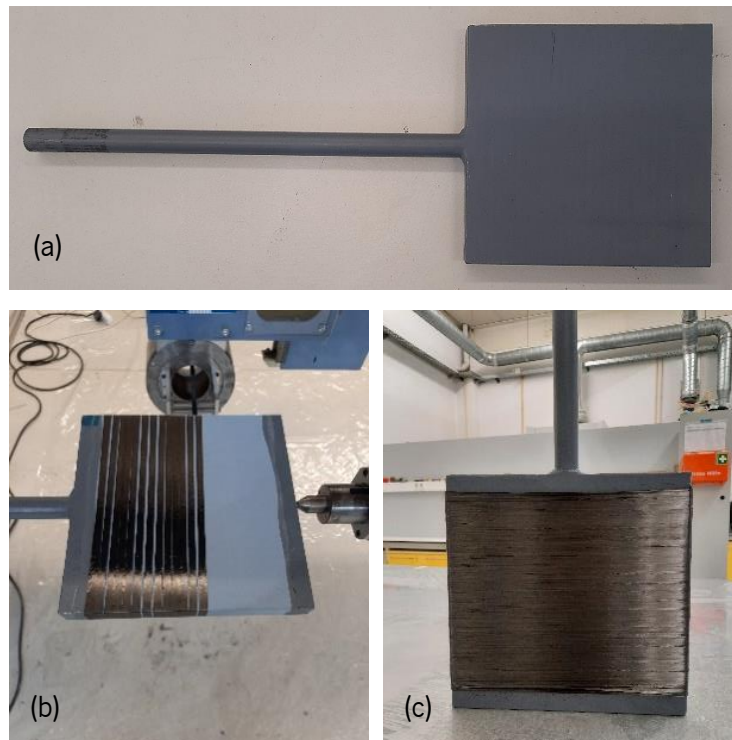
(a) plate-shaped steel mandrel, (b) tape winding over the steel mandrel and (c) final wound composite structure for specimens production
